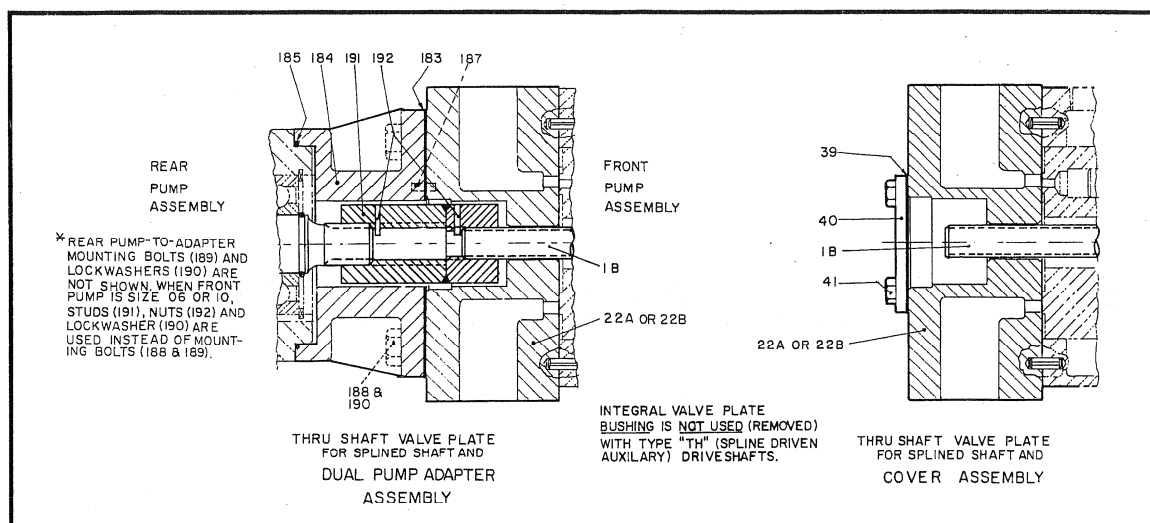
Parts drawing Showing Driveshaft w/SAE Spline Shaft (Side Ports) DS-SW-8A. (511783)
